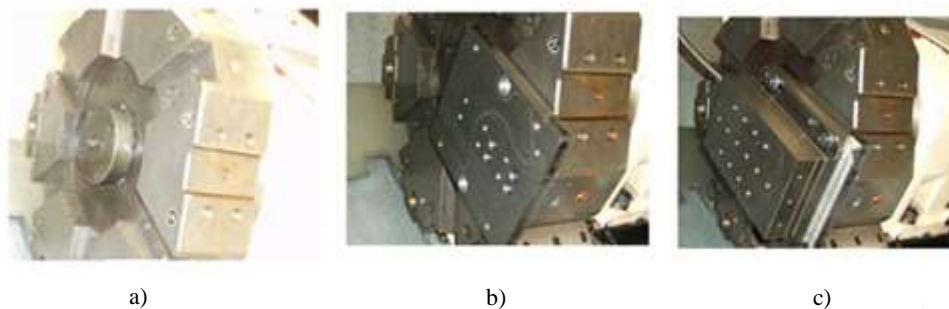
Tool Turret: a) Empty b) Assembled With the Fixing Support c) Assembled With the Fixing Support and the Dynamometer
